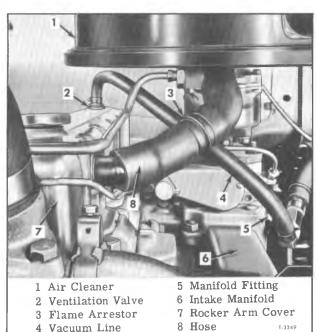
Crankcase Ventilation System on In-Line, 6 Cylinder Engine (Typical)
